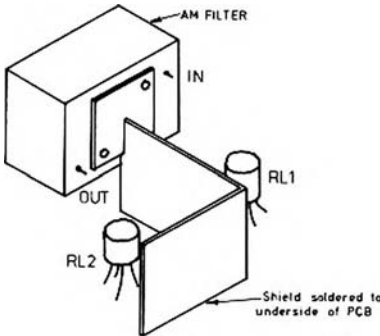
[a] FILTER MOUNTING & SHIELD LAYOUT
